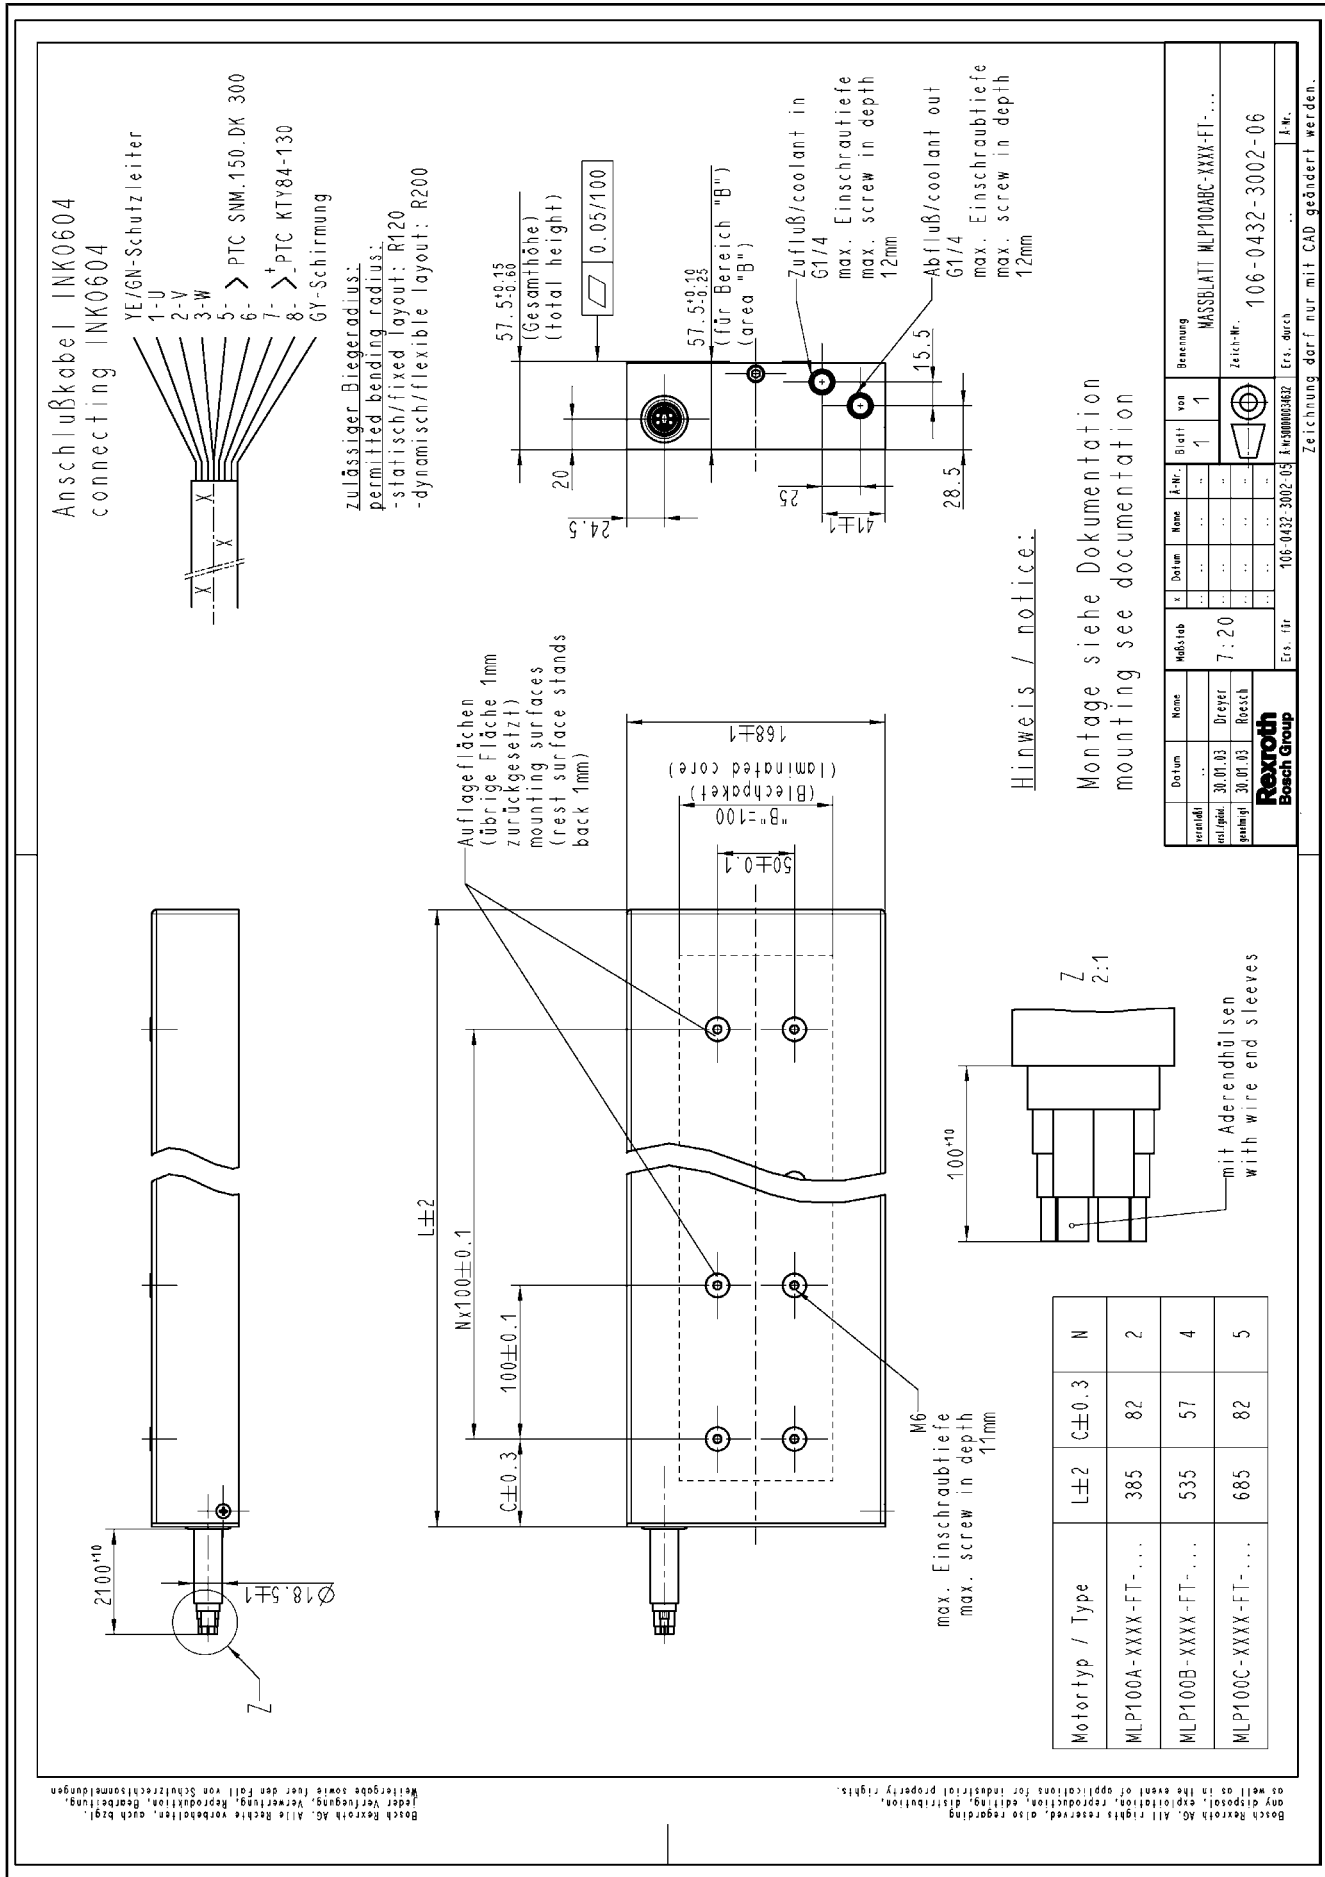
Primary Part MLP100 with Thermo Encapsulation
